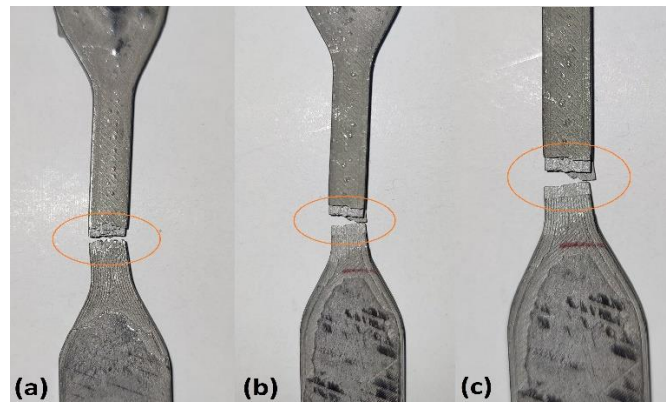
Cross-sectional view of the fractured neck section of
